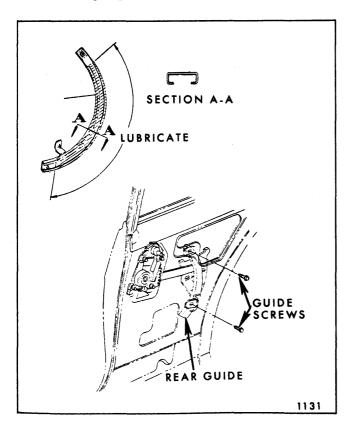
Rear Quarter Window Guide - "X-11" Styles
